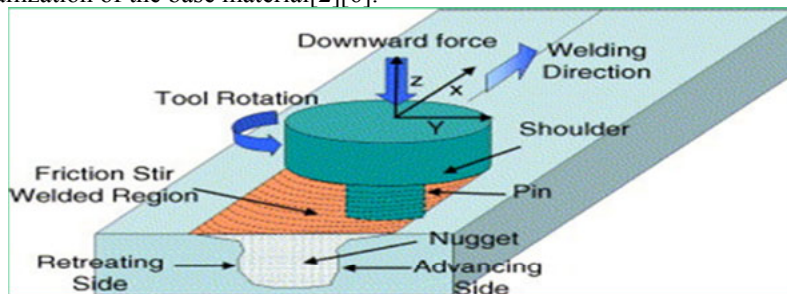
Schematic Drawing of Friction Stir Welding
